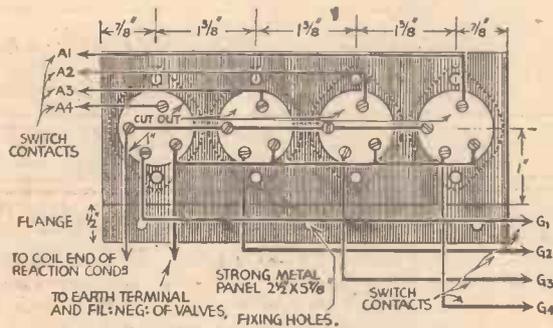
Coil-holder base, showing positions of ceramic coil-holders, and connections.
